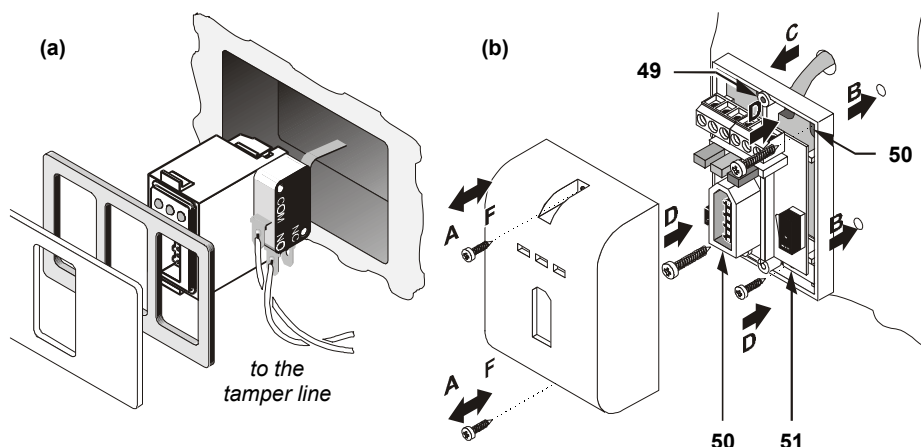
Flush mounting key reader (a); Wall mounting key reader (b)
